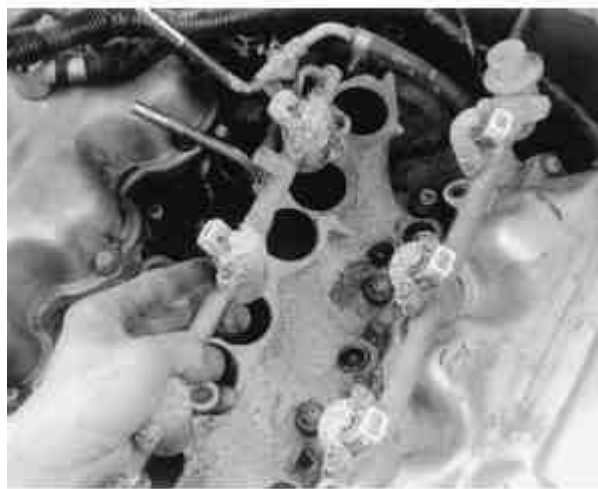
In order to remove the injectors, loosen and remove the cover retainers
